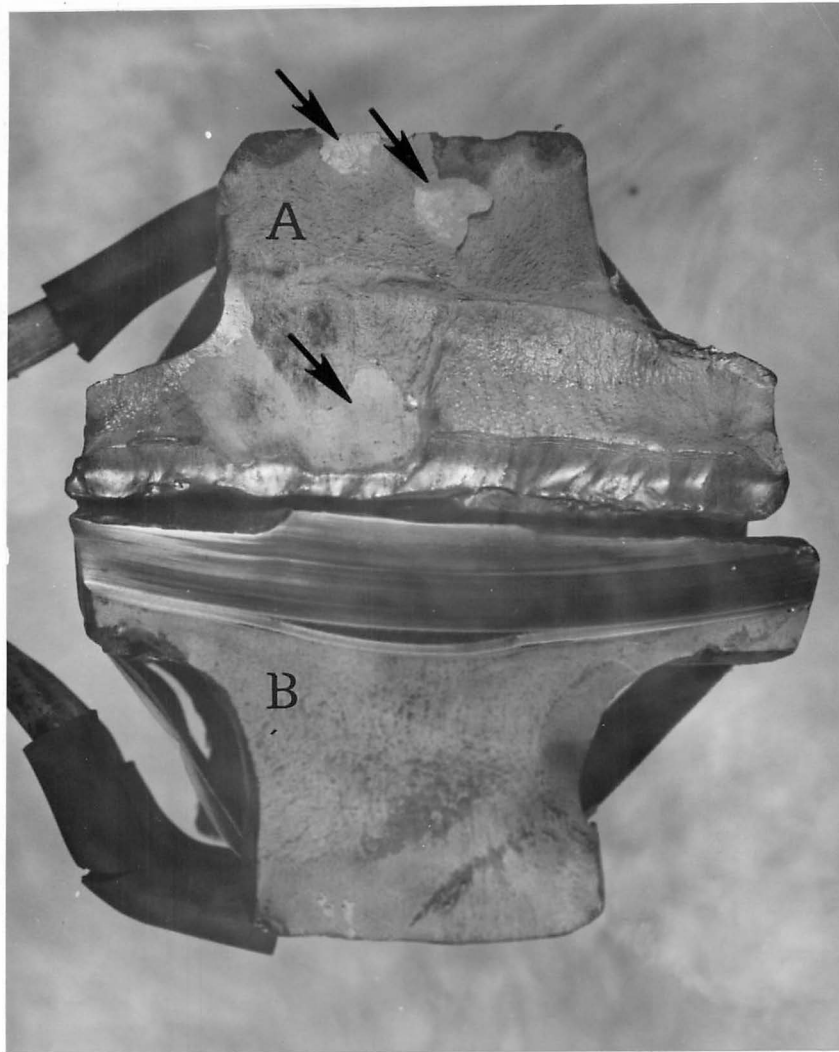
Fracture faces of two different flash welded joints made in Inconel 625.
